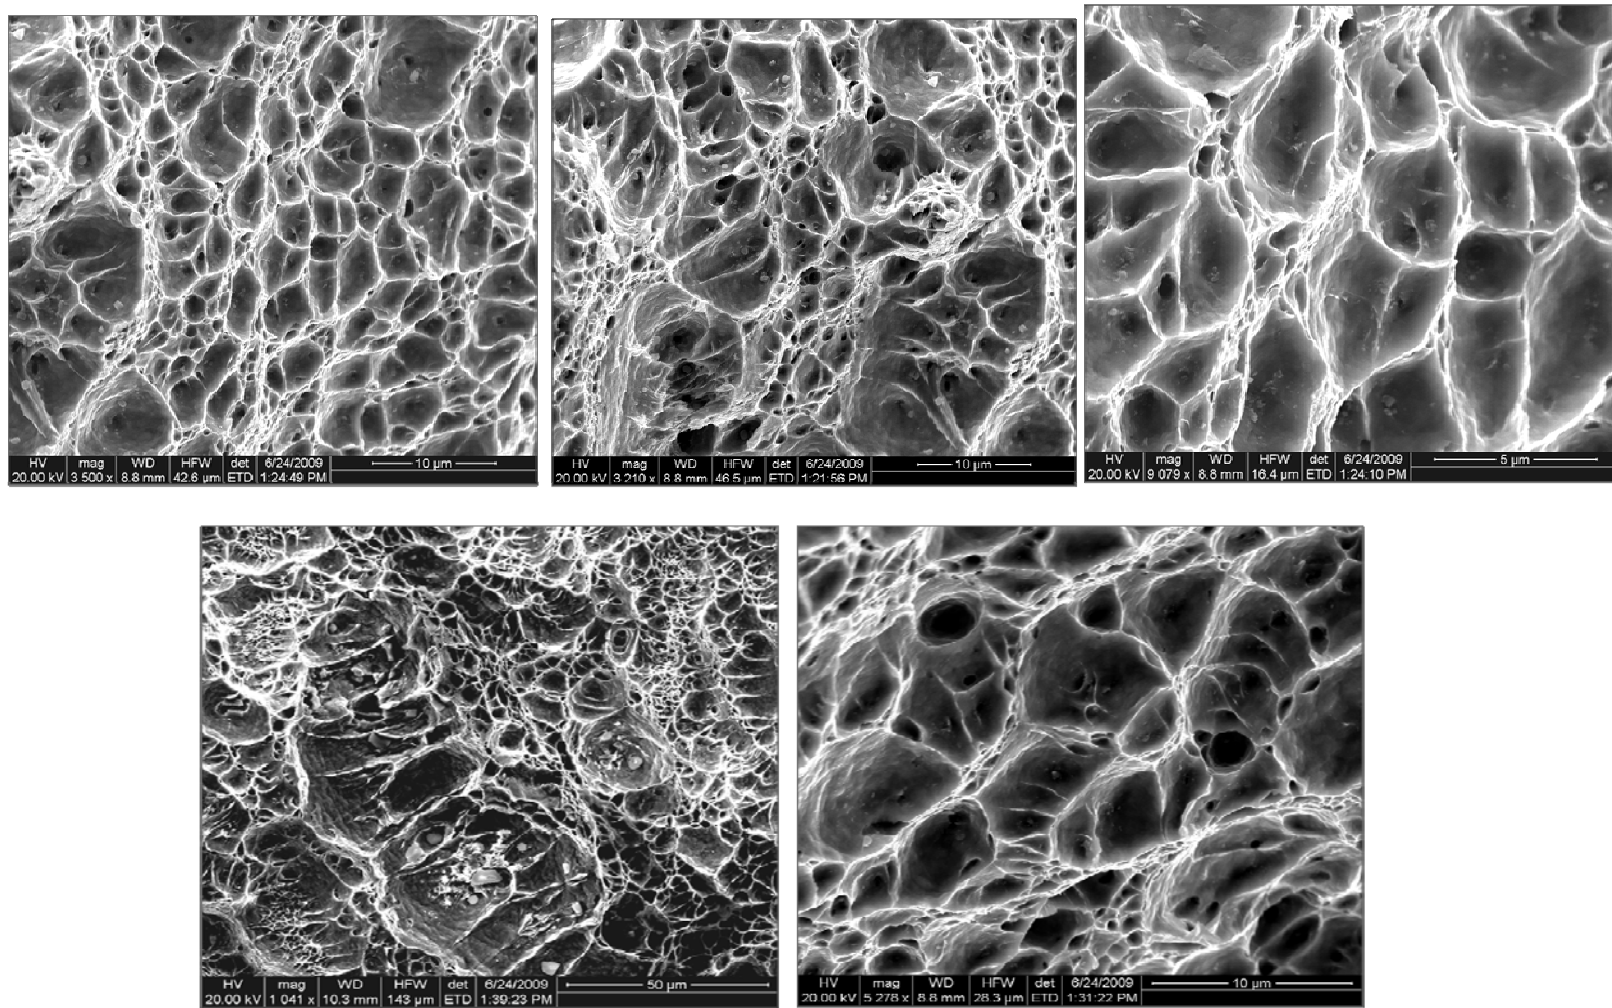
More fracture surfaces taken from the center of the broken sharp notched bar sample 2B3-R.
